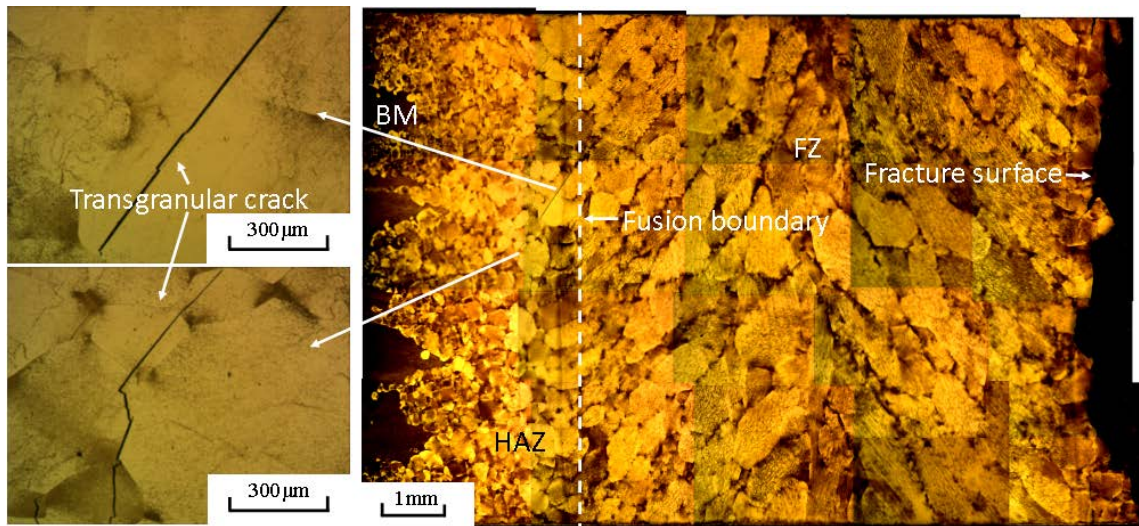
Top surface optical image of the fractured sample aged at 600°C for 5mins
